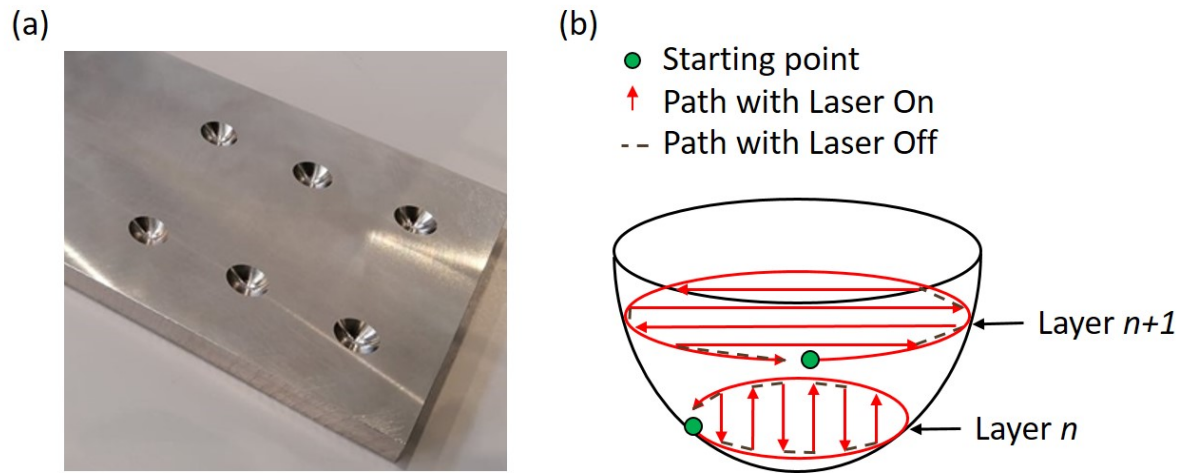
(a) Ellipsoidal holes machined in the SS316L substrate and (b) 90°-Zigzag deposition pattern used.
